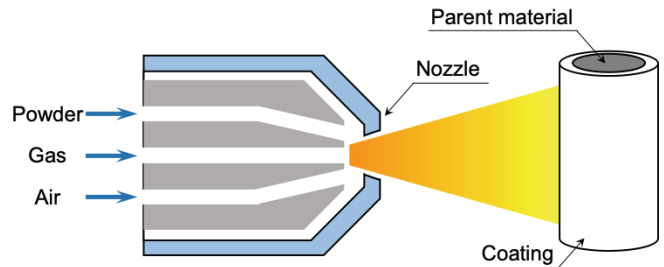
Schematic Drawing of Thermal Spraying Technology
